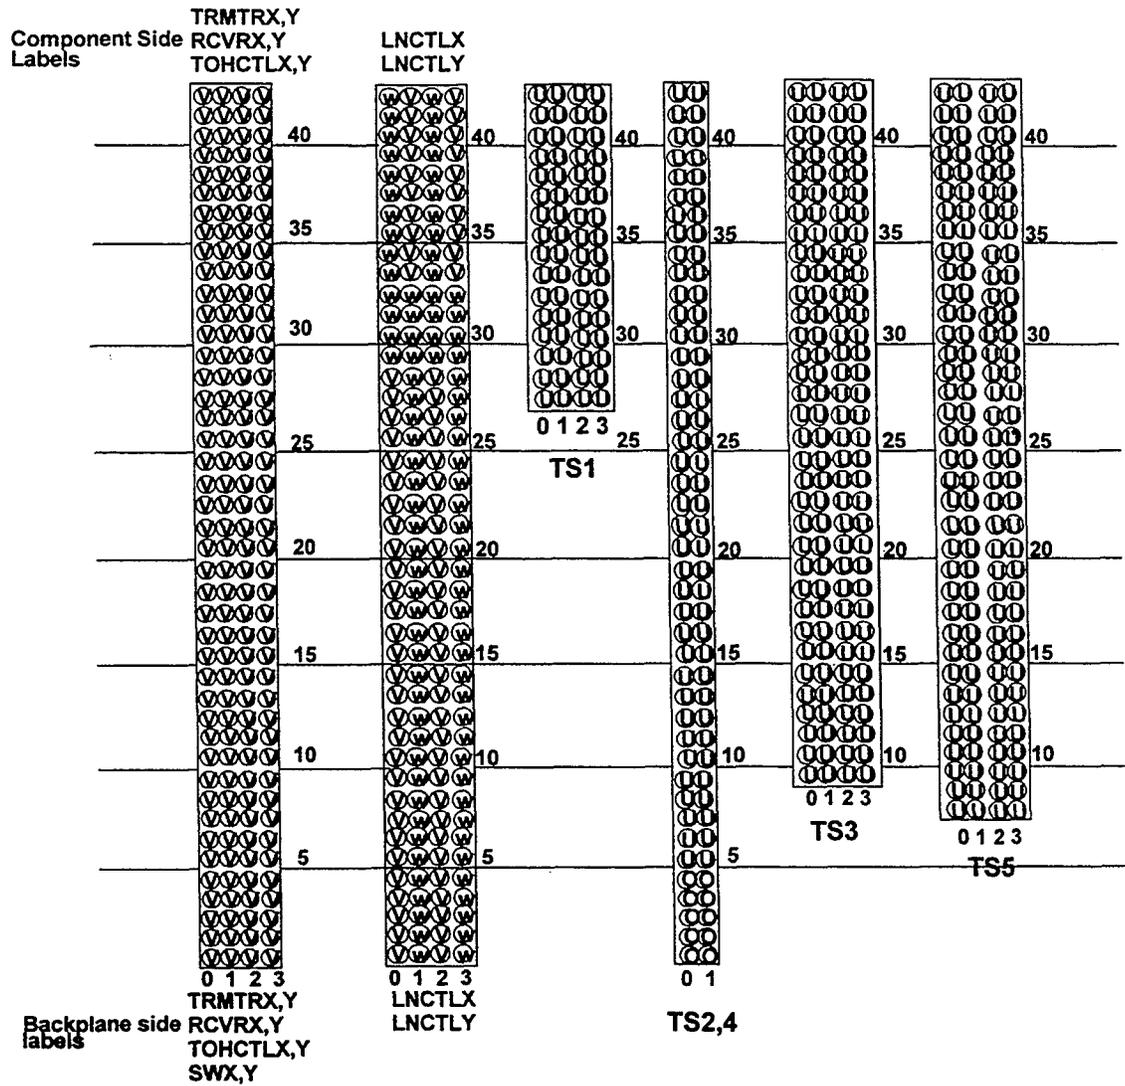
LCT High Speed Shelf (Lower) - Component Side View
